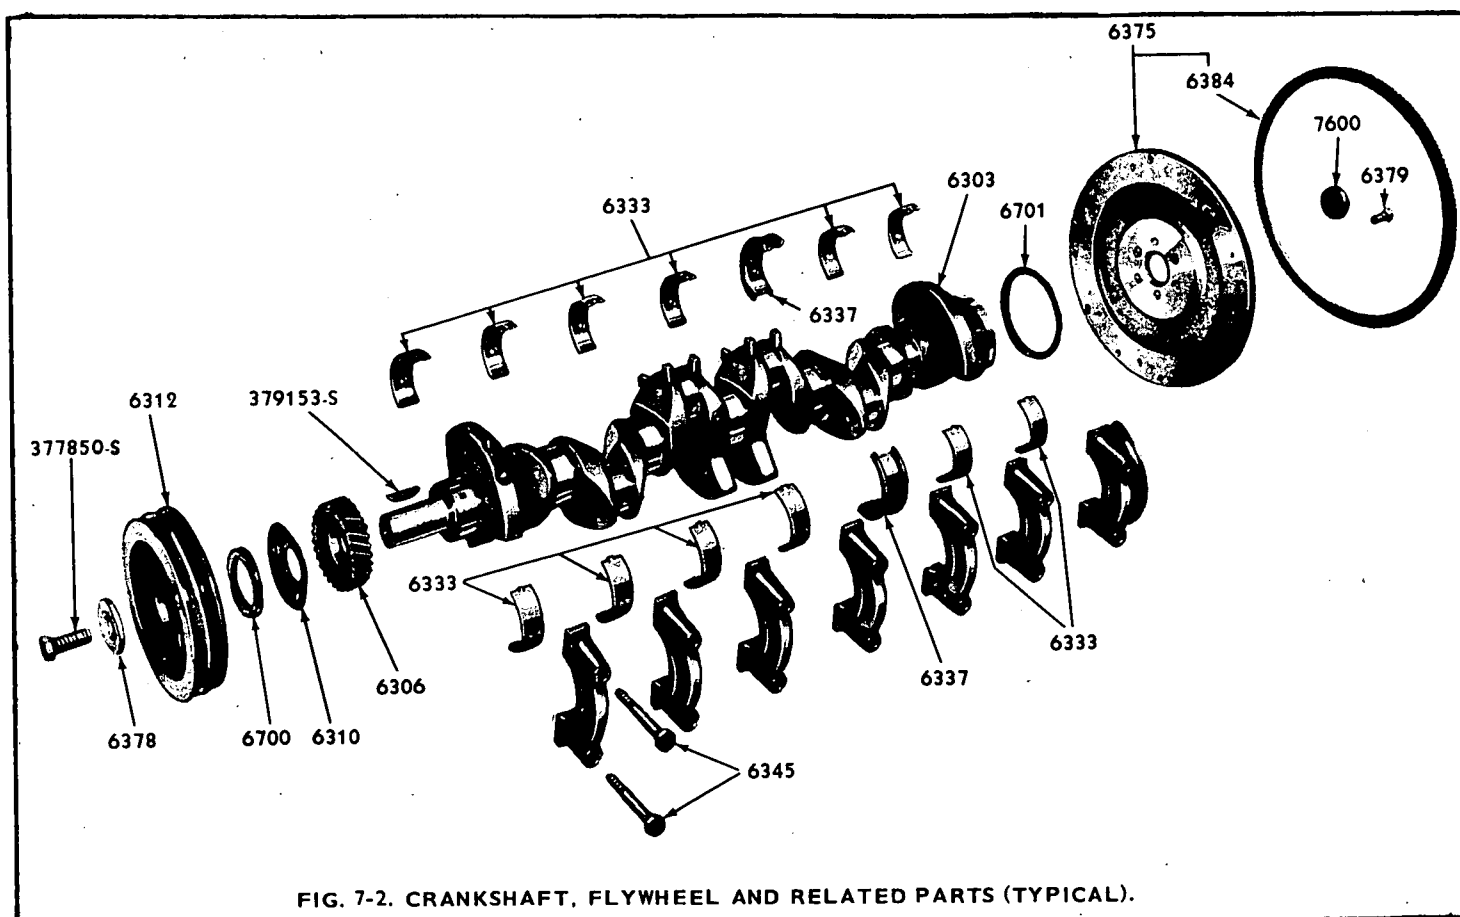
CRANKSHAFT, FLYWHEEL AND RELATED PARTS (TYPICAL).
